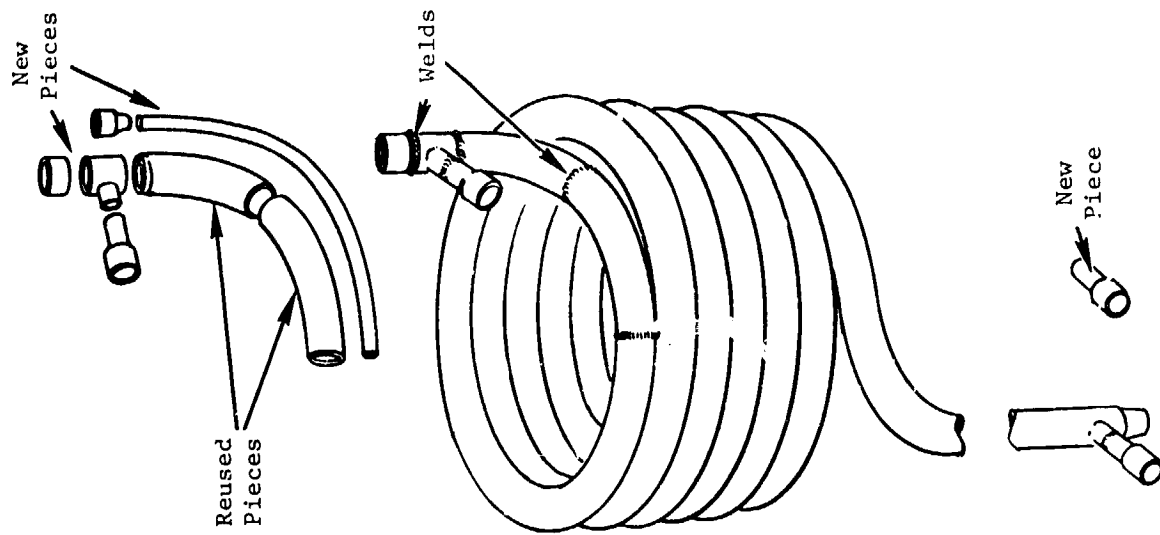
Bottom of the Boiler Following Repair Welding.
